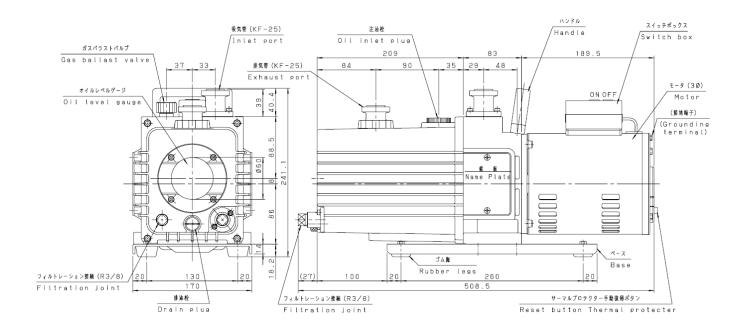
Dimensional drawing of GCD-136X oil sealed rotary vacuum pump
